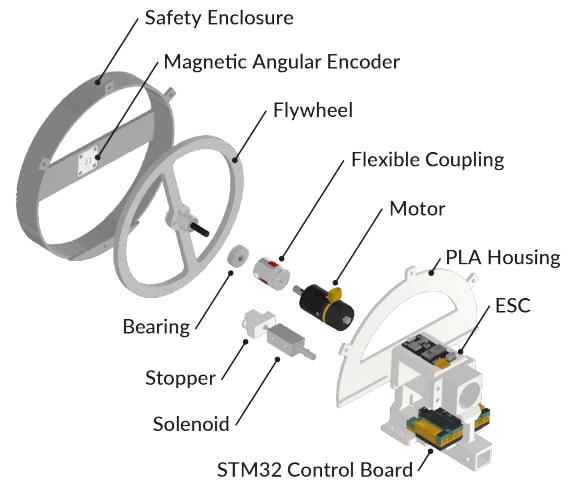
Exploded view of the key components of a SpinShot device (VR controller mount and optical tracking markers are not shown).
